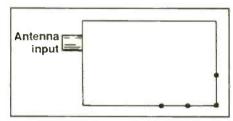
For the tuner of Figure 1, to separate the circuit board from the frame, wick out the solder at the points shown. Then peel the bottom away from the circuit board. This allows access to the chip.
